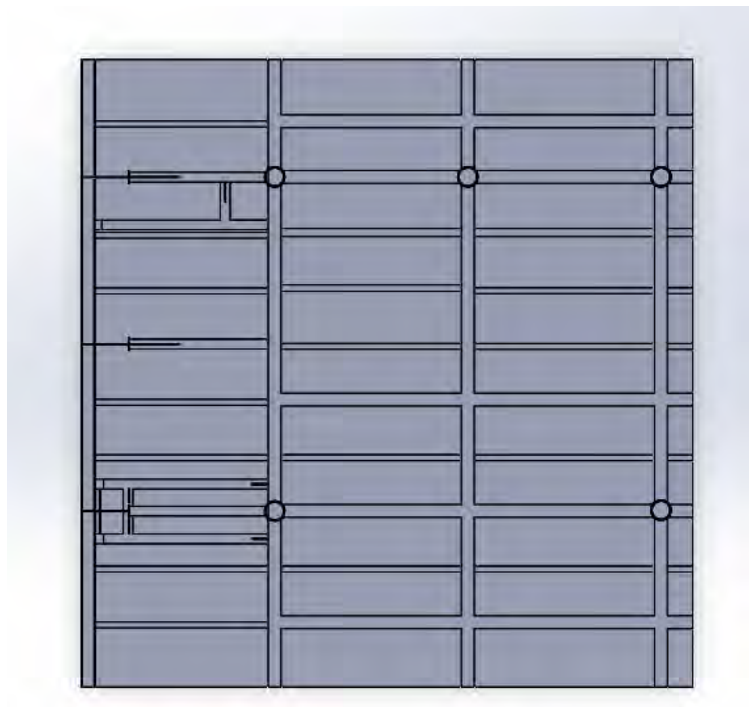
6 SOLIDWORKS 3D model design, Bottom view
